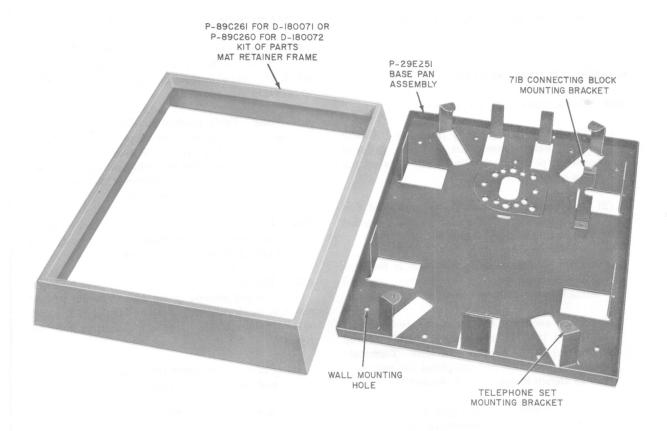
D-180071 or D-180072 Kit of Parts For Surface Mounting
